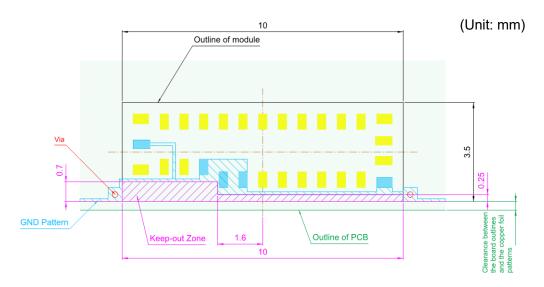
Recommended dimensions of the module footprint solder resist opening (Top view)
